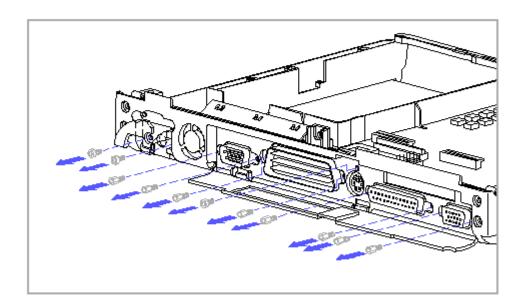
Removing the I/O Connector Screws and Screwlocks
